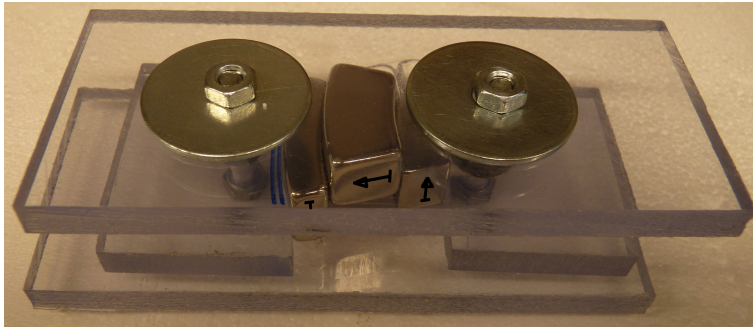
Assembly of the magnetic triplets in a Halbach array. The assembly tool was made from 6 mm thick plexiglas.
